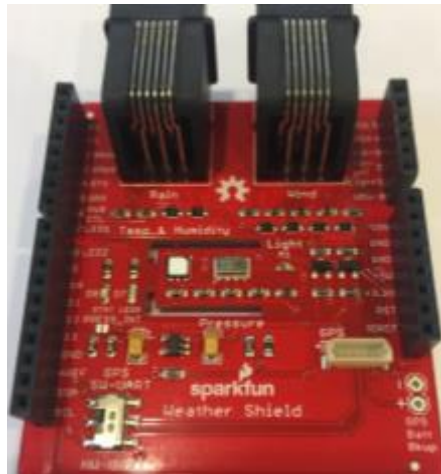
Female header pins and RJ11 connectors in Weather Shield.
